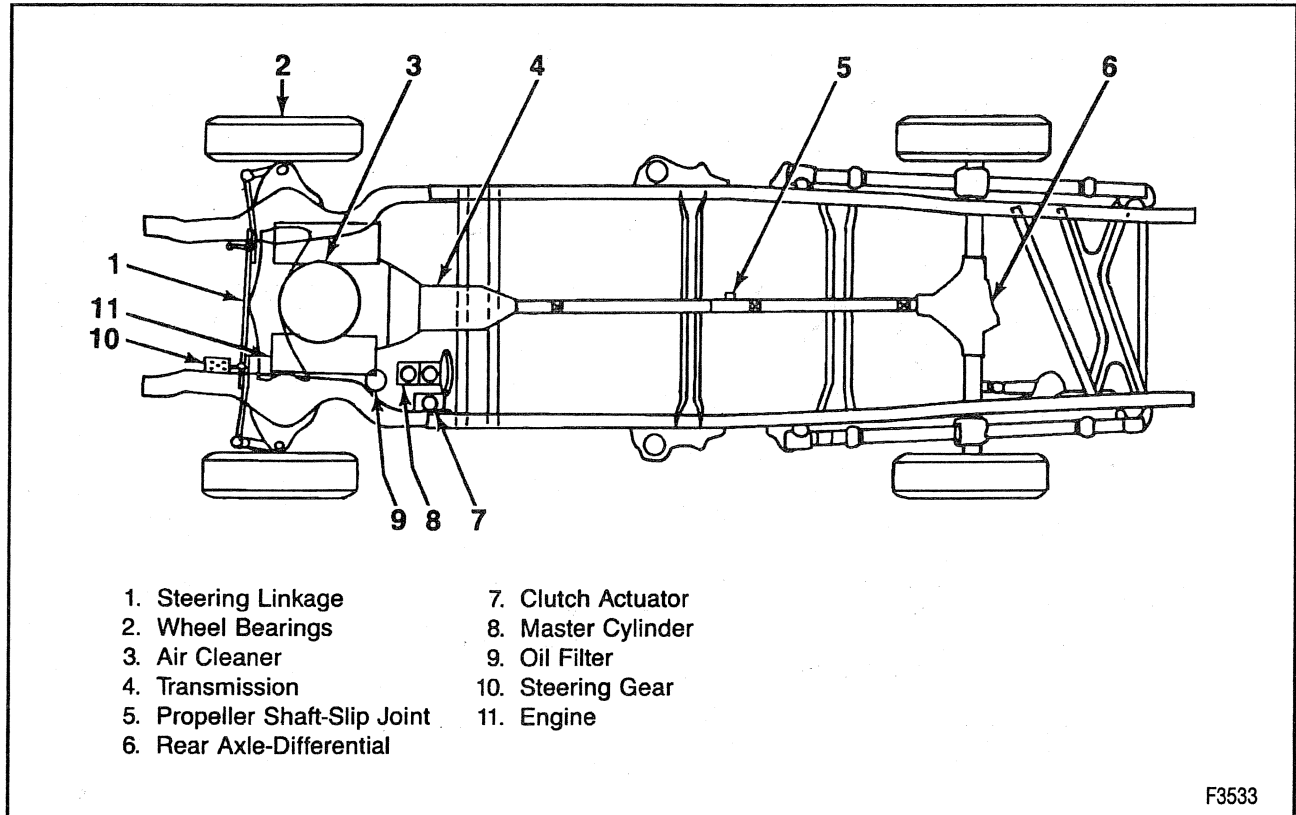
Lubrication Points (Two-Wheel Drive Models)
